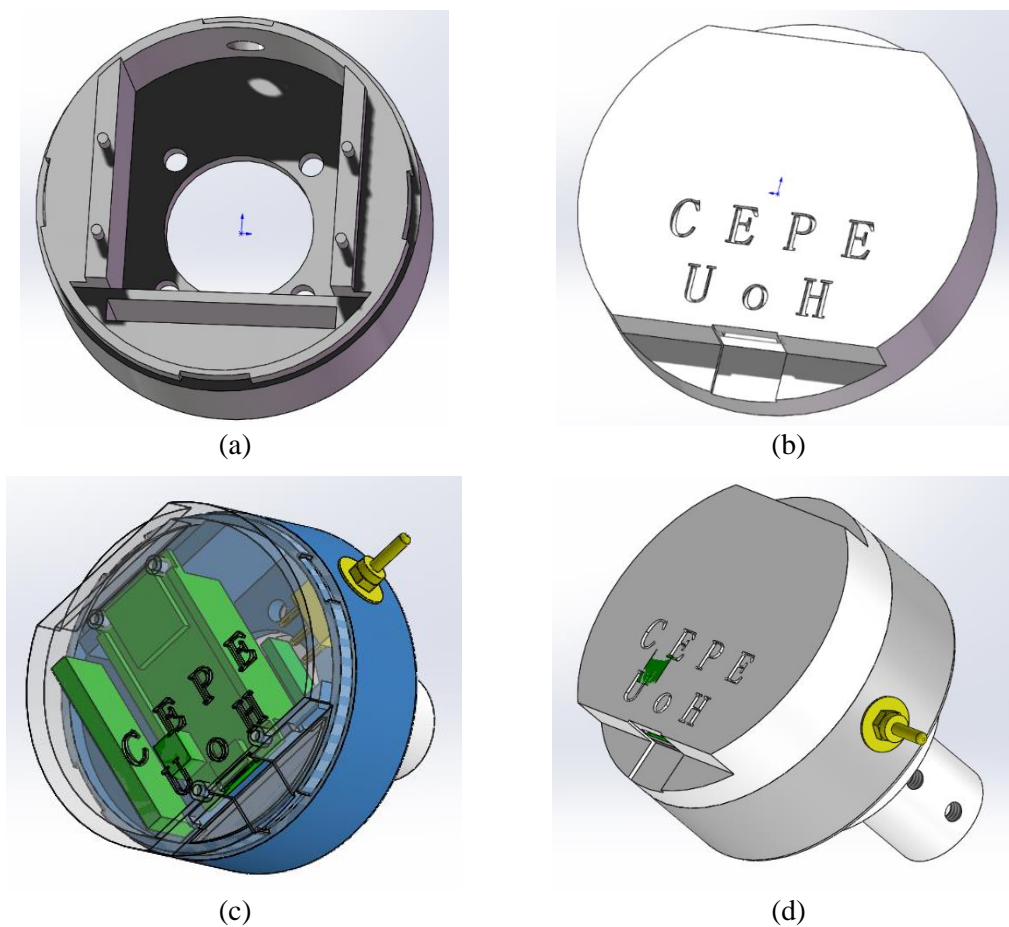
Design of package for on rotor sensing application: (a) box body, (b) box cover, (c) internal structure, and (d) assemble
